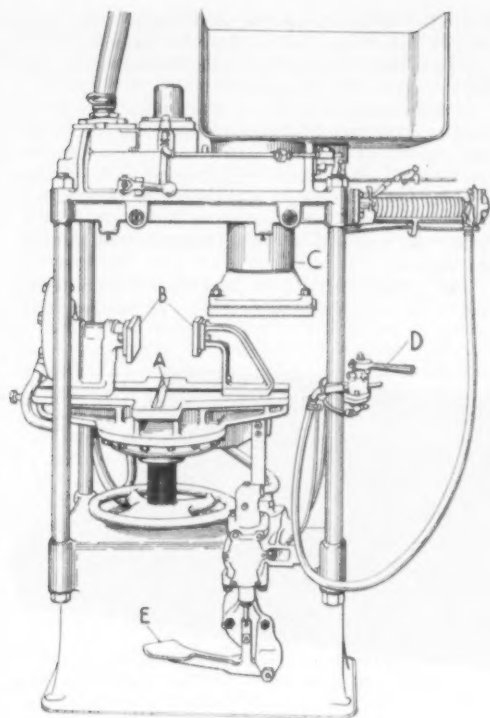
Bench blower. Operator fills head (A) with sand. Attached to head's lower end is blow plate with hole pattern matching that of box (B). Head is placed on top of box and both are positioned beneath cylinder (C). Lever (D) presses cylinder down on head and box, sealing connections, while valve (E) releases air pressure, forcing sand into the box.
